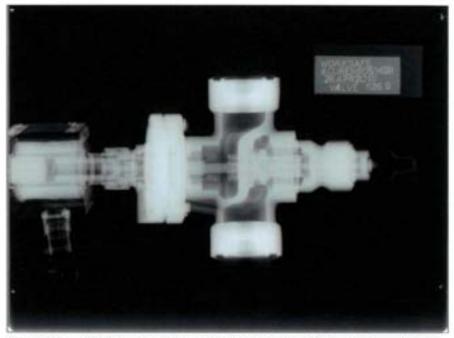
Radiographic view of solenoid valve B-26 showing closed position with stem turned in.
